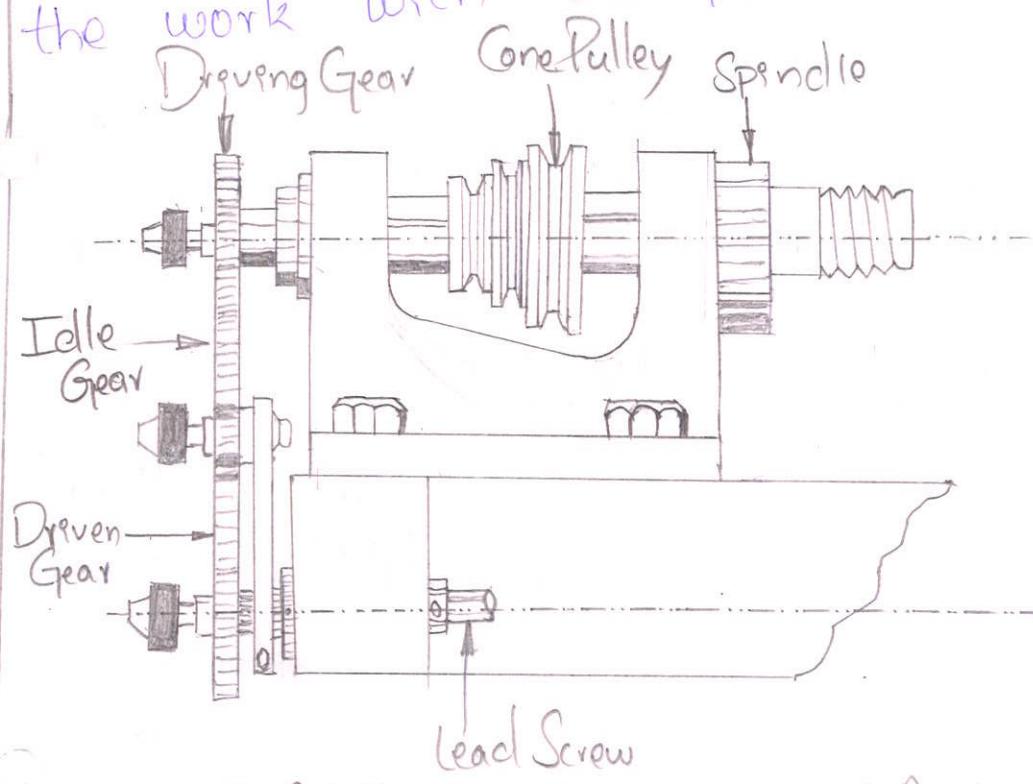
Speed Changing Mechanism in the Head Stock Housing.
